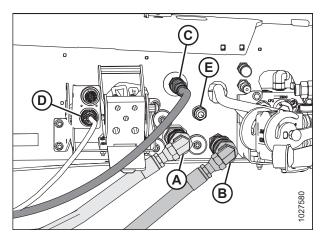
Hydraulics and Electrical – Draper Ready Windrower
